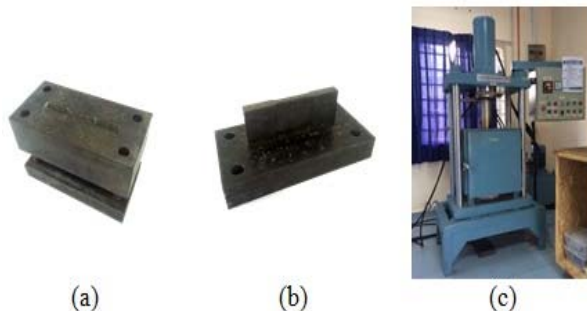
Forming equipment (a) bottom mould, (b) top mould, (c) hot press forging machine.
